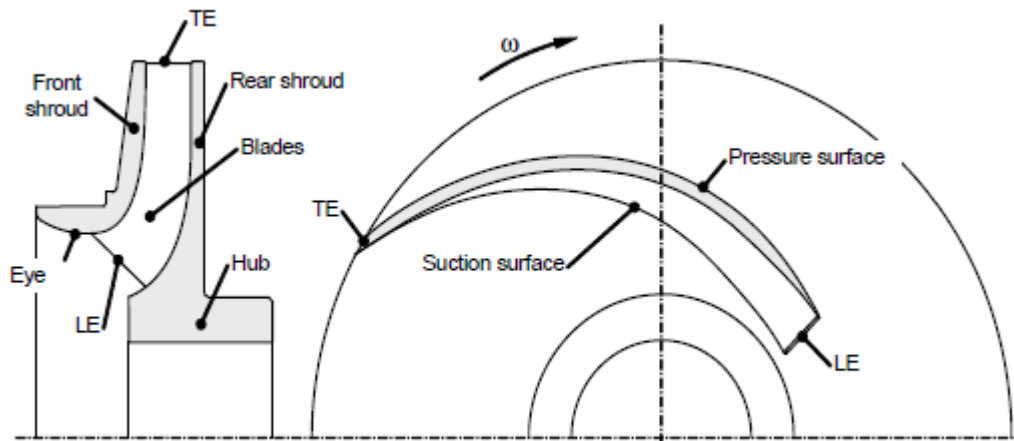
Meridional section and plan view of a radial impeller (LE: Leading edge, TE: Trailing edge) [6]
